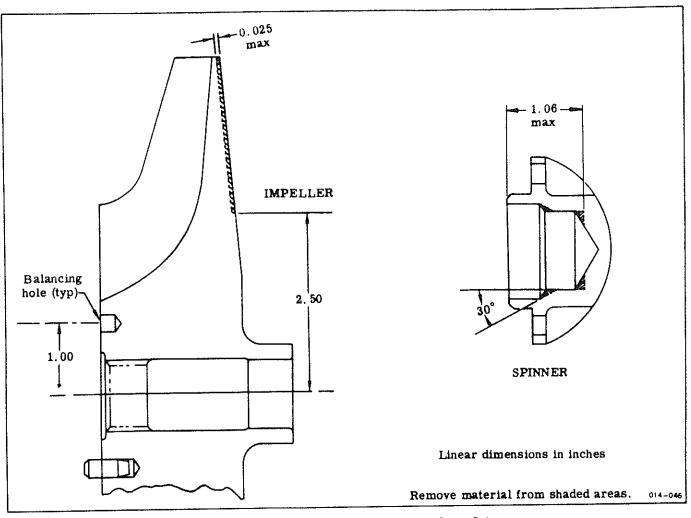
Balancing Impeller and Anti-Icing Spinner
